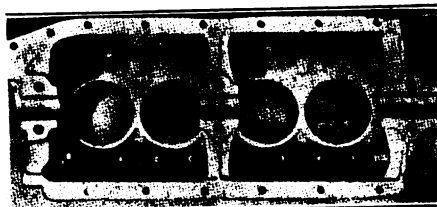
OIL GROOVES SHOULD BE CUT IN THE CENTER AND REAR BEARING
